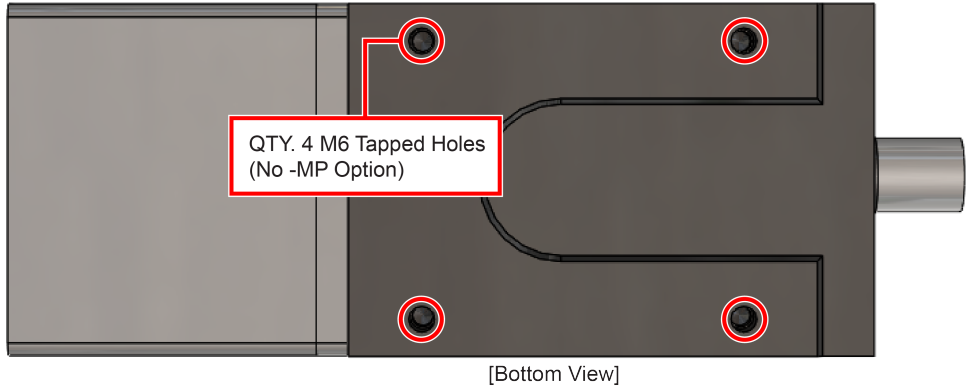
ASR1000 Stage Without Mounting Plate (Bottom View)
